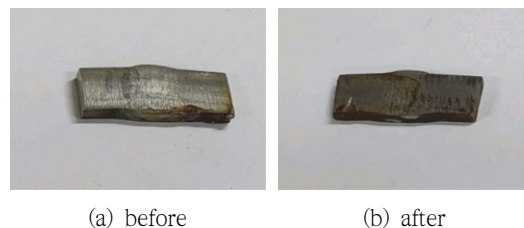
The specimen surface depend on PWHT (1 month corrosion)
